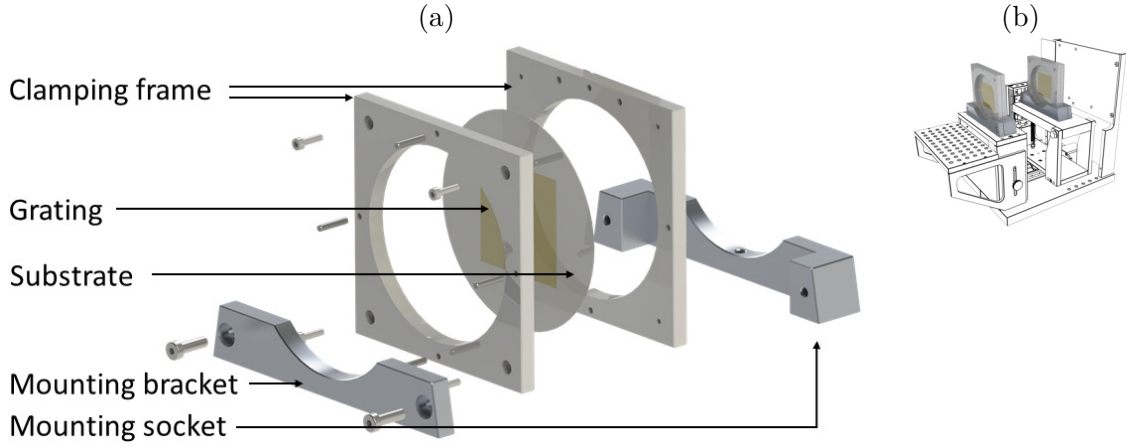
(a) Exploded assembly view of the grating frame and the mounting socket. The gratings are put into a clamping frame. This frame is in turn fastened to the platforms of the setup with the mounting socket. (b) Mini map of the portable setup.
